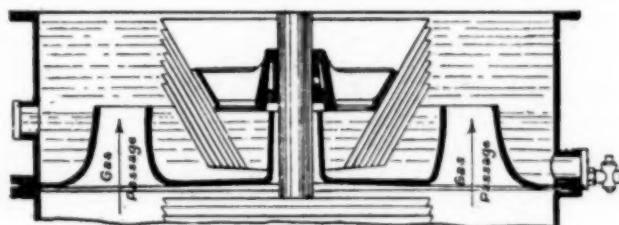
ENLARGED VIEW OF ONE OF THE CHAMBERS.
